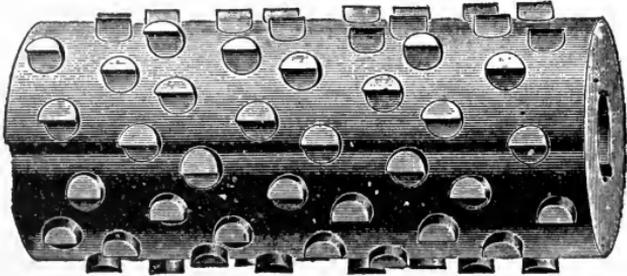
Form of Inserted-Tooth Cutter Called Slabbing Cutter
